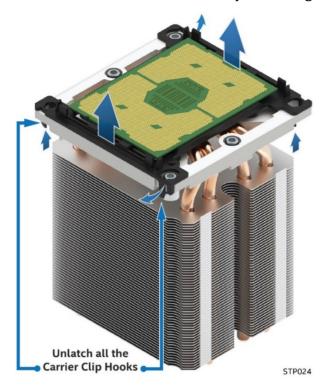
Releasing the Processor Carrier Clip from the Heat Sink
